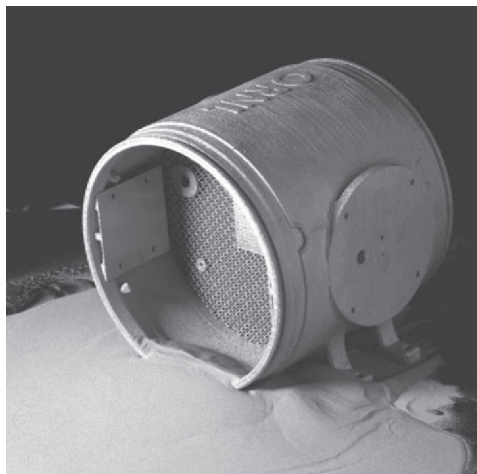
Hydraulic manifold built using EBM technology. The part was built at the MDF in Oakridge National Laboratory through an ONR-sponsored project. (Courtesy ORNL, TN.)
